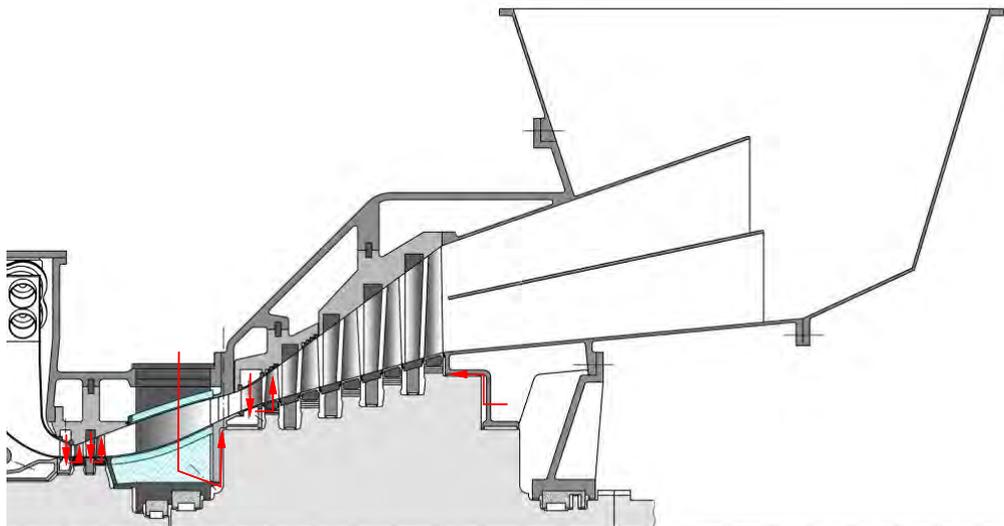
Design of two-stage HTTC and 50 Hz HTTP
